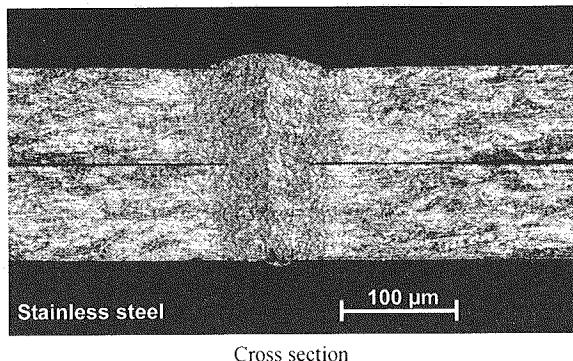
Welding of stainless steel of 0.1mm thickness
